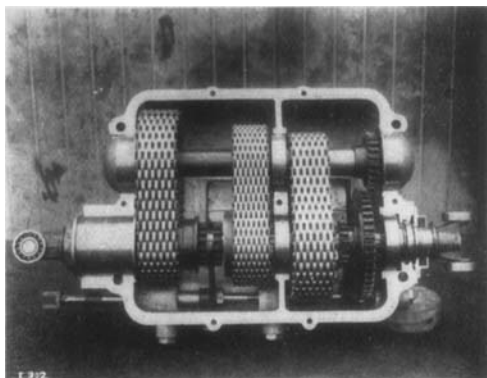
Gearbox fitted with Noiseless Drive Chains.
